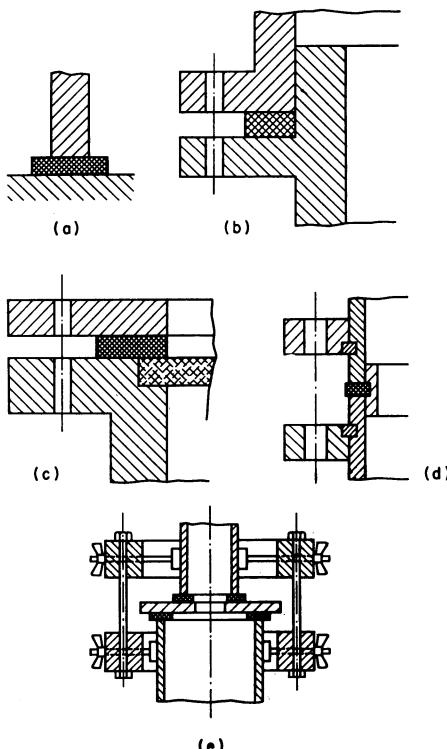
Plane seals: (a) without clamping; (b) corner clamping; (c) window seal; (d) tubing seal with lock ring (after Lauritzen⁷⁴⁶); (e) double gasket seal for joining pipes with dissimilar diameters (after Weintrob¹²⁹²)
